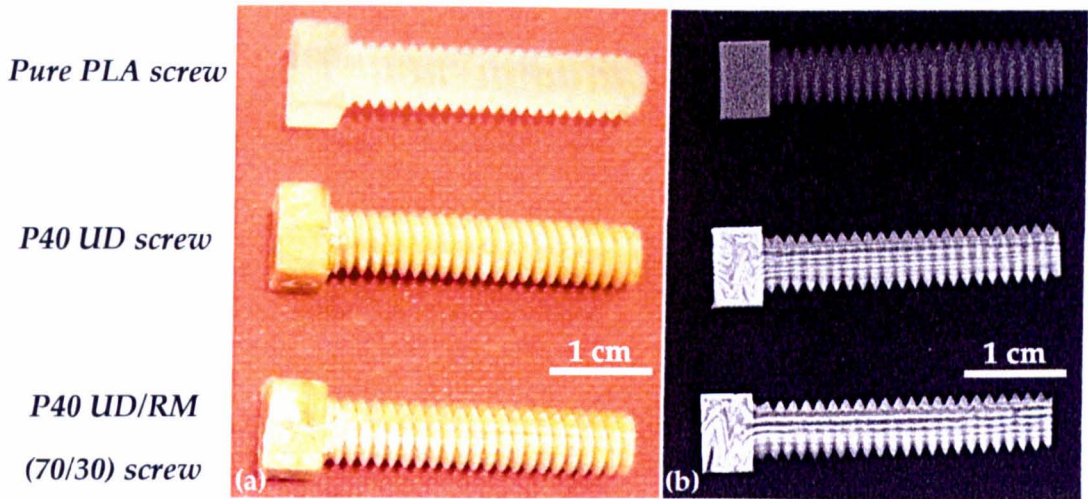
(a) Optical and (b) X-ray photographs for PLA, P40 UD and P40 UD/RM screws used in this chapter.
